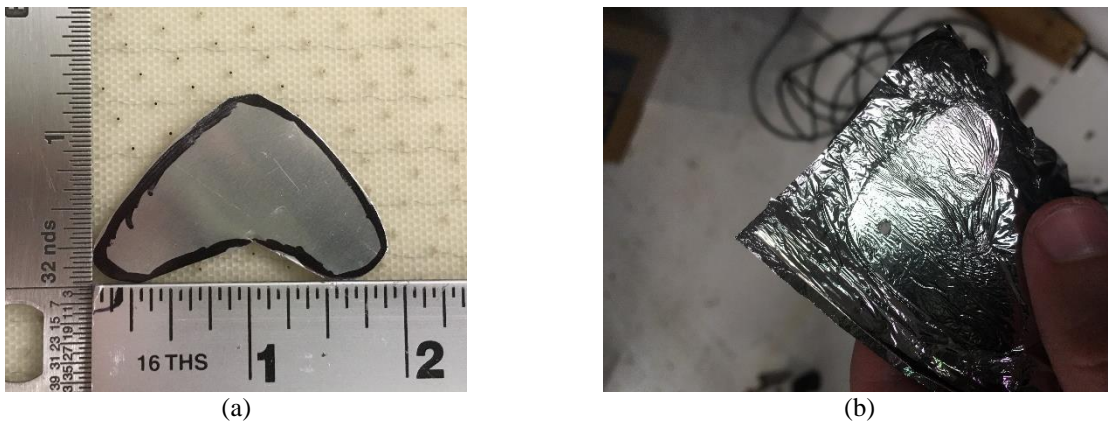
Sail corner fittings. The shape was cut from sheet metal (a) and sandwiched between the membrane and a PEN sheet (b) using hot-melt polyester web adhesive.
